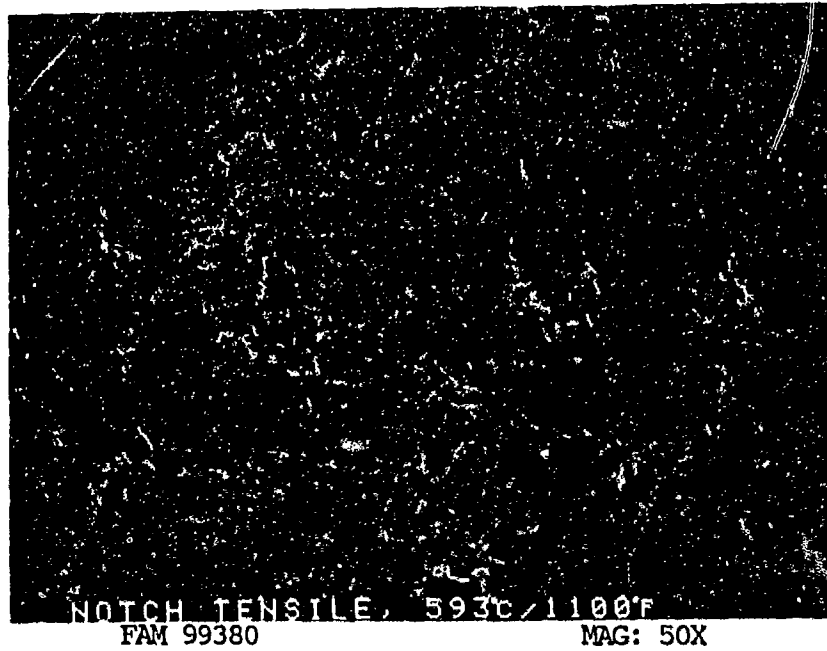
Low magnification photograph showing fracture surface to be relatively flat. Even at low magnification, equiaxed dimples are visible.
